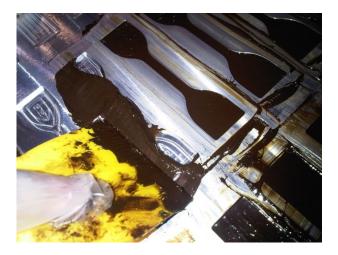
Metal scrapers should be avoided for a number of reasons: The first being that the sealant bonds quite well to metals making cleaning difficult, and the second being that metal scrapers will damage the aluminium mold.
